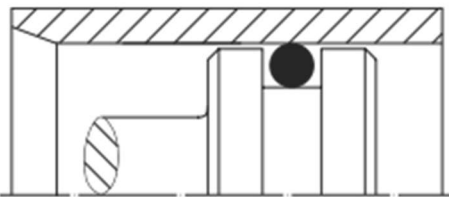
Male gland ("piston seal"): O-ring with radial compression
